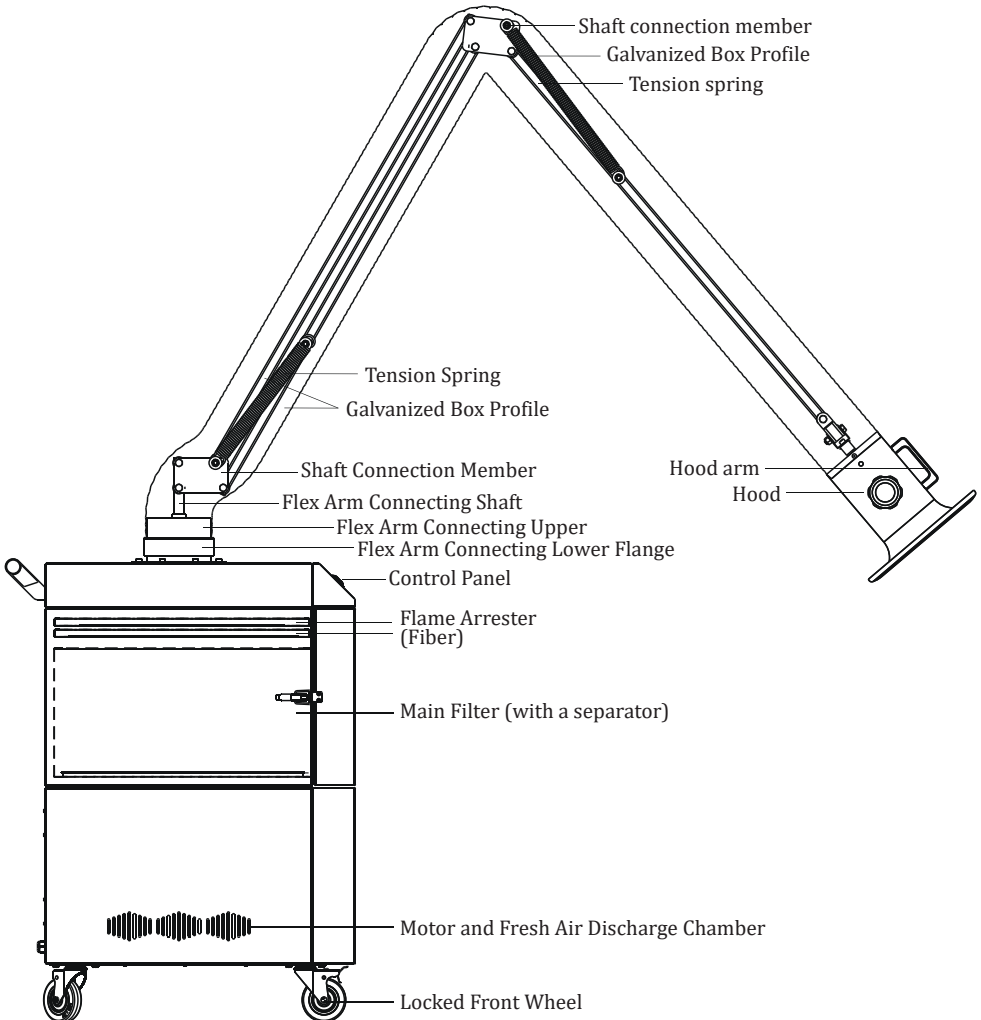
Inner Structure And Assembly Of The Flex Arm
